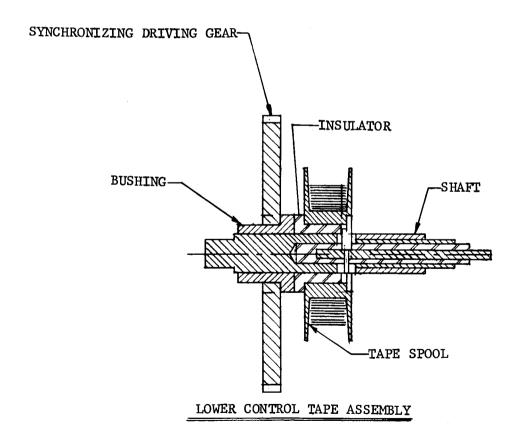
CROSS-SECTIONAL CONFIGURATION OF EXTENSION CONTROL TAPE ASSEMBLIES
